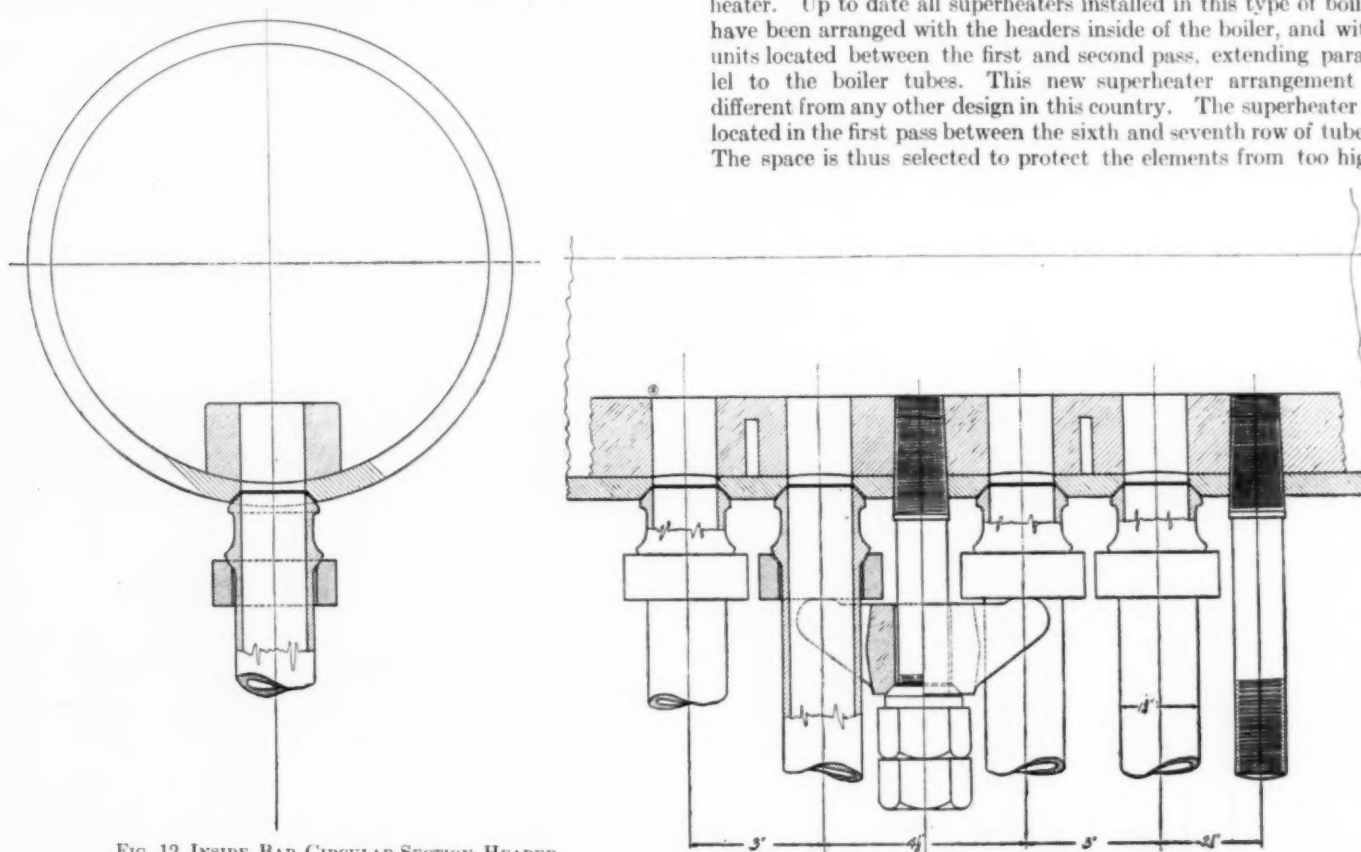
INSIDE BAR CIRCULAR-SECTION HEADER
